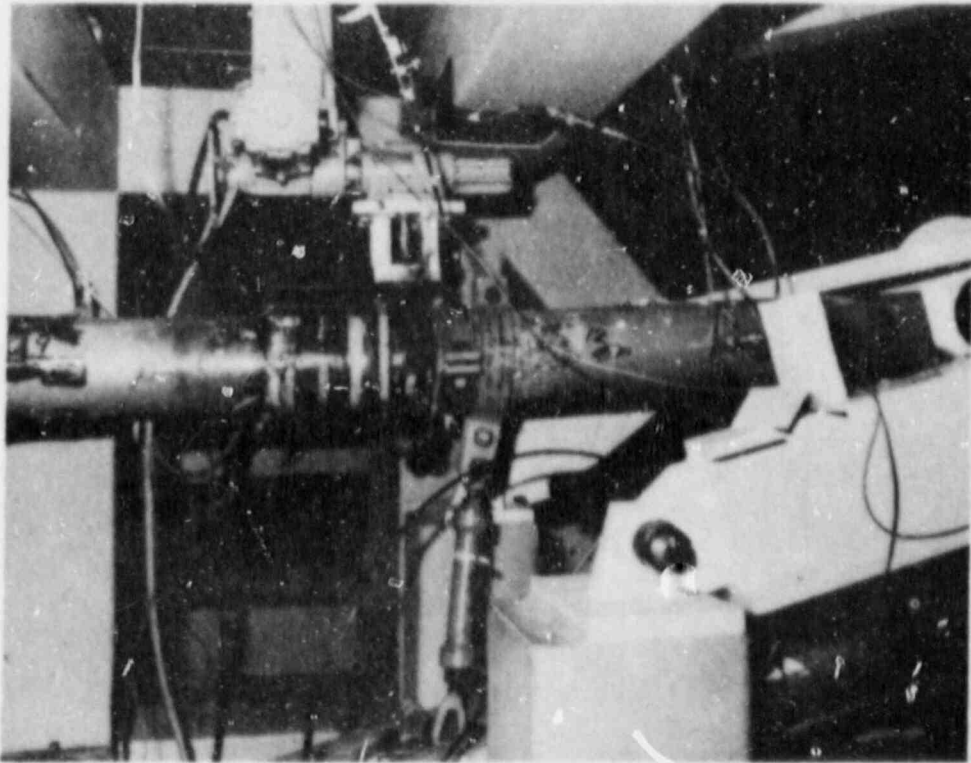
Broken inside vertical strut for 8-in. butterfly valve test.
